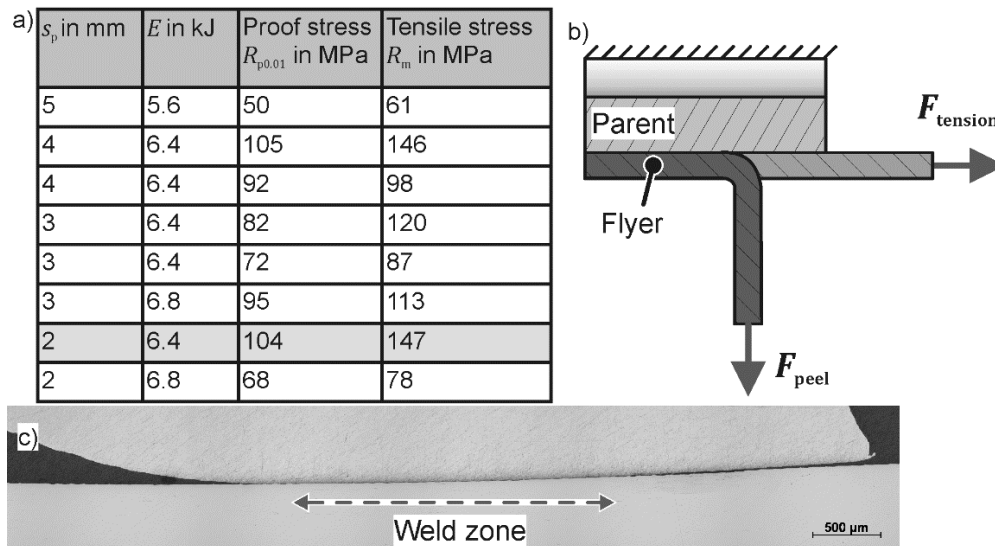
a) Results of tensile test, b) Schematic for tensile and peel test, c) Micrograph of welded specimen
